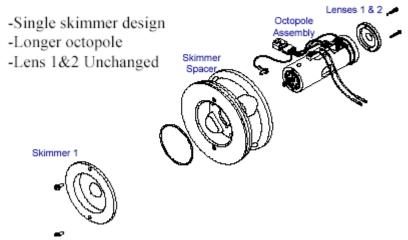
An exploded view of the ion optics assembly for instruments without skimmer 2 (6130 or 6150)
